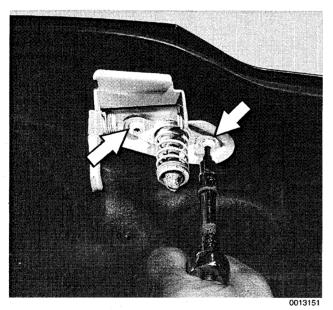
Hood latch mounting bolts (arrows). Left latch shown.
